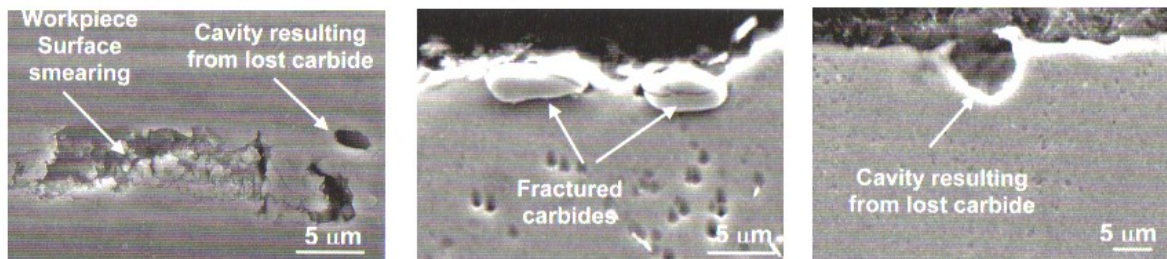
SEM images of workpiece surface damage and cross sections after HSM [150]
